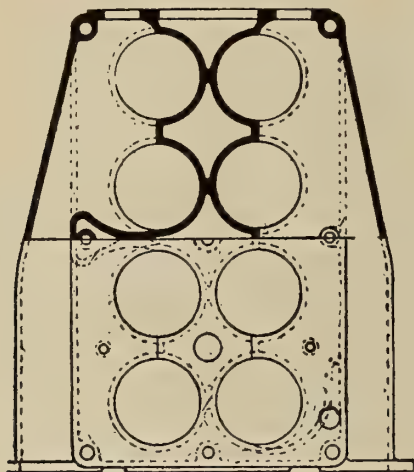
DUPLEX SLEEVE VALVE MOTOR, PLAN VIEW WITH HEAD BLOCK DETACHED, SHOWING THE SEMI-CIRCUMFERENTIAL PORT AREAS
